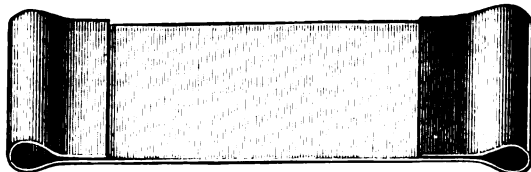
Flat Steel Link for Connecting the Buckets.
